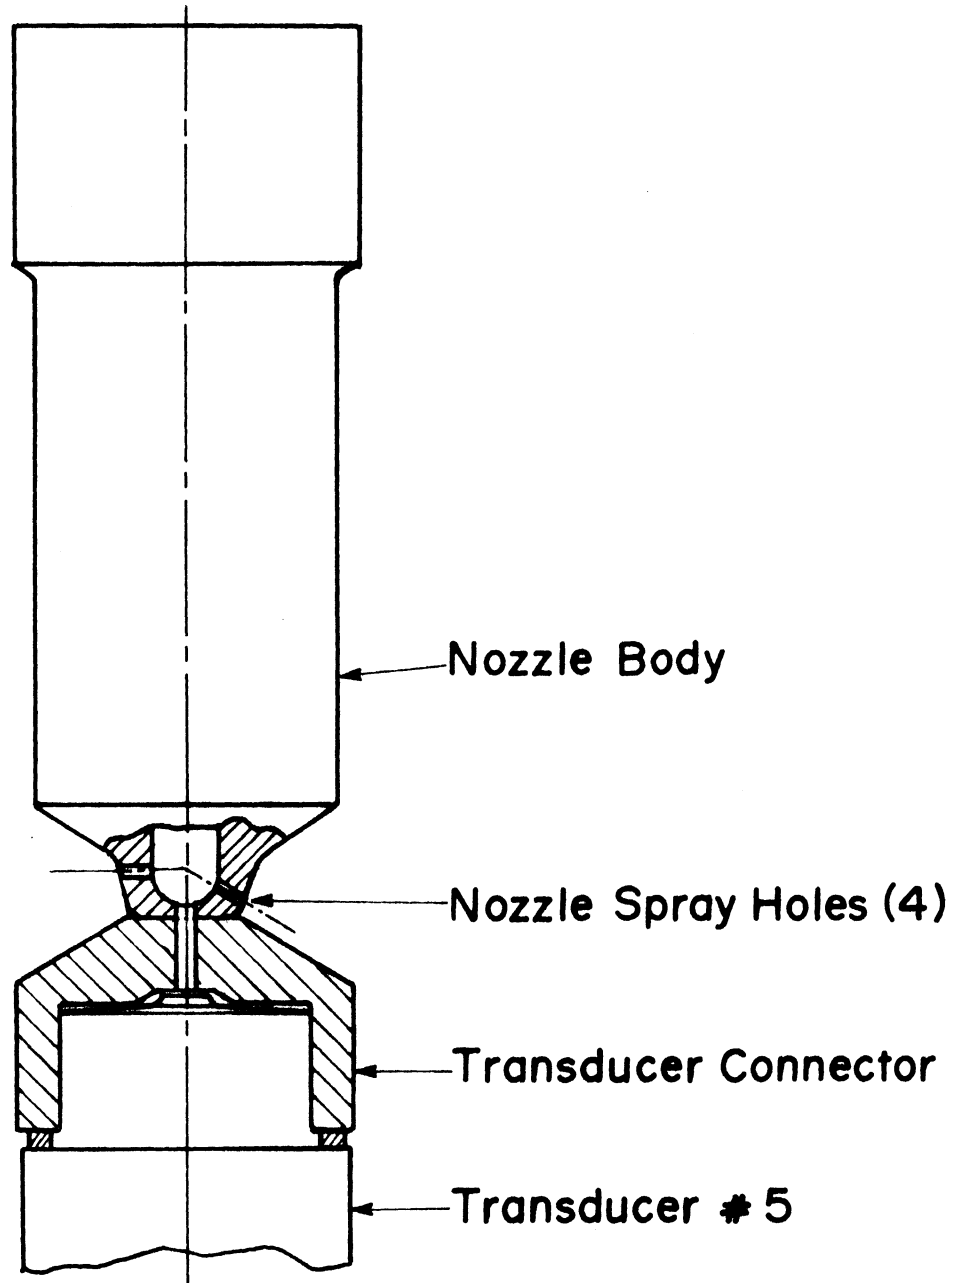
Sectional View of Connector and Nozzle Modification Details.
